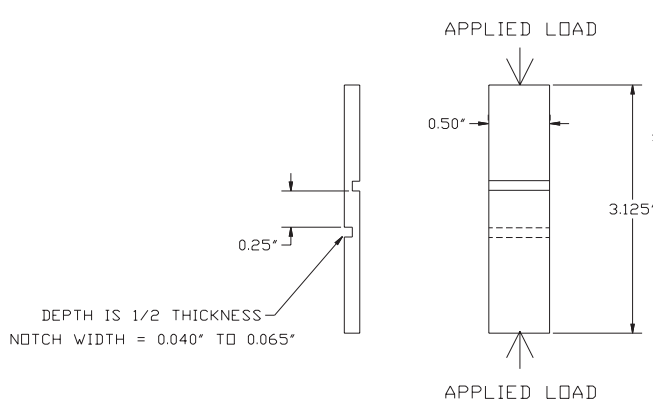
Test Specimen Configuration for ASTM D-3846 In-Plane Shear Test
